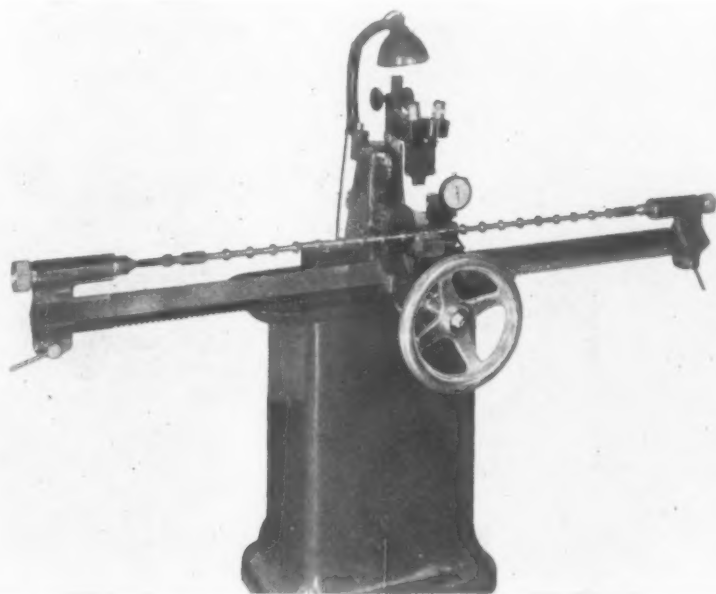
The rifling broach inspection fixture provides visual inspection through a microscope of 20 times enlargement.
